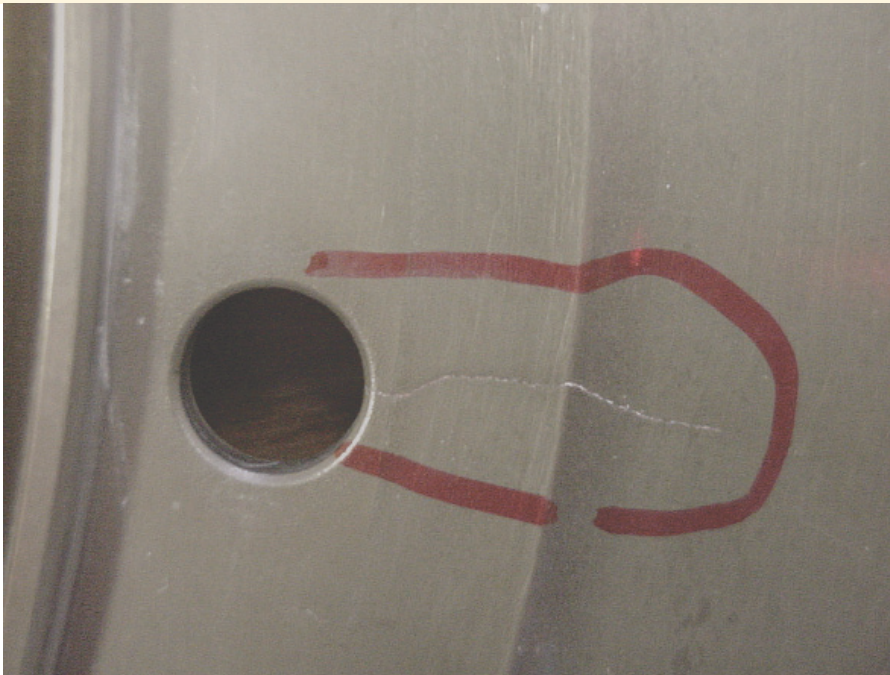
Example of a fatigue crack detected before the component failed. The test automatically stopped once the crack was detected.
